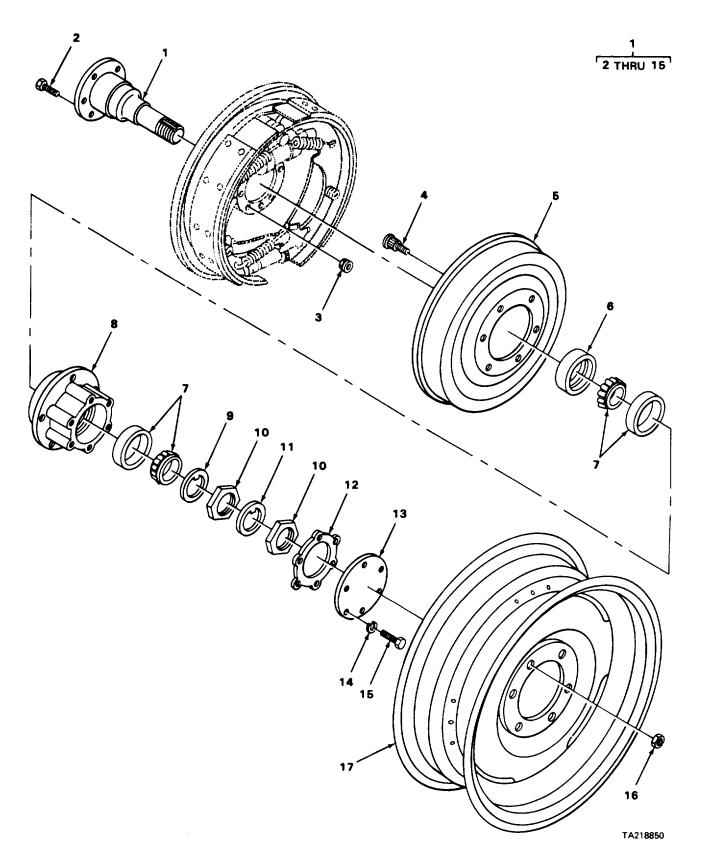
WHEEL AND HUB ASSEMBLY.
